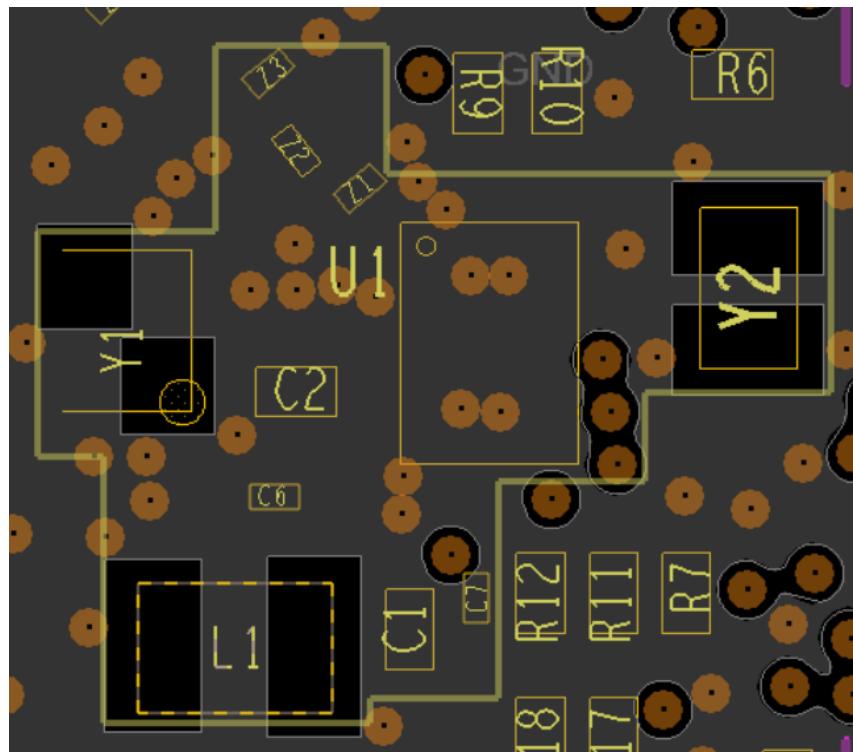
FCGQFN24 PCB Placement and Routing – GND Plane - INT1 Layer
